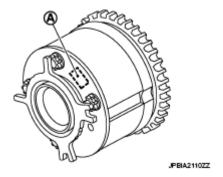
Identifying Camshaft Sprockets Identification Mark Courtesy of NISSAN MOTOR CO., U.S.A.
